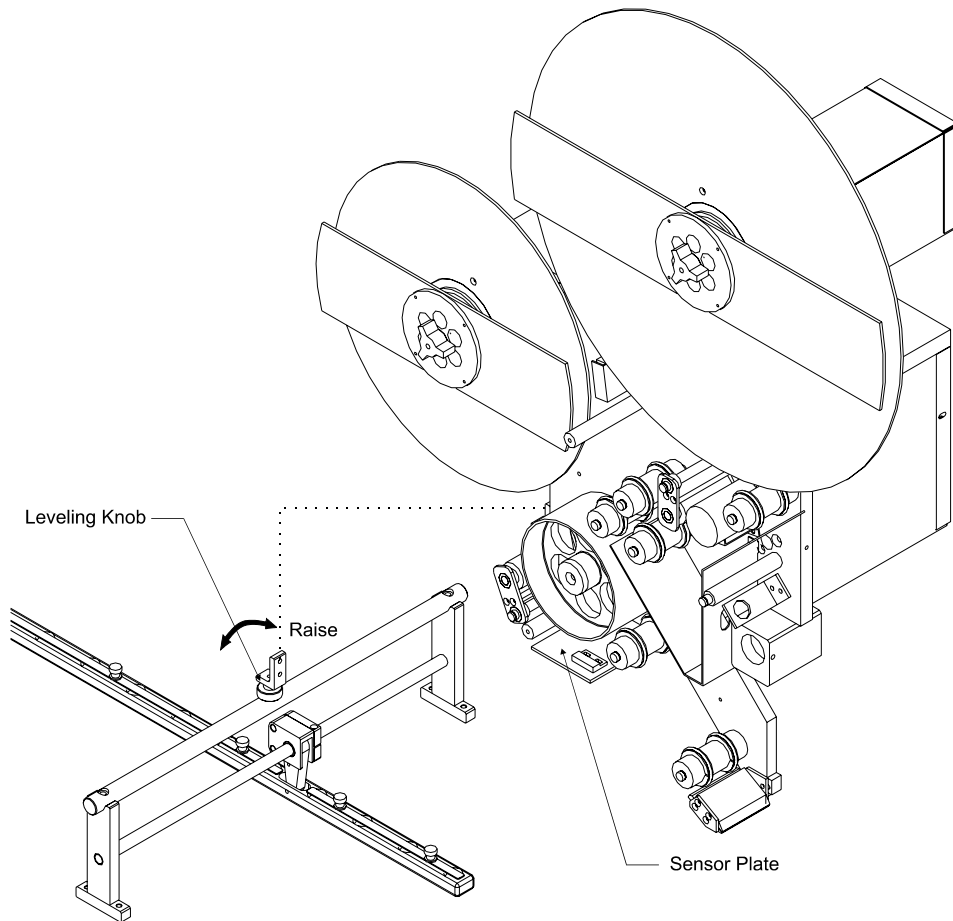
Illustration of the leveling knob and its mounting to the tabbing head.
